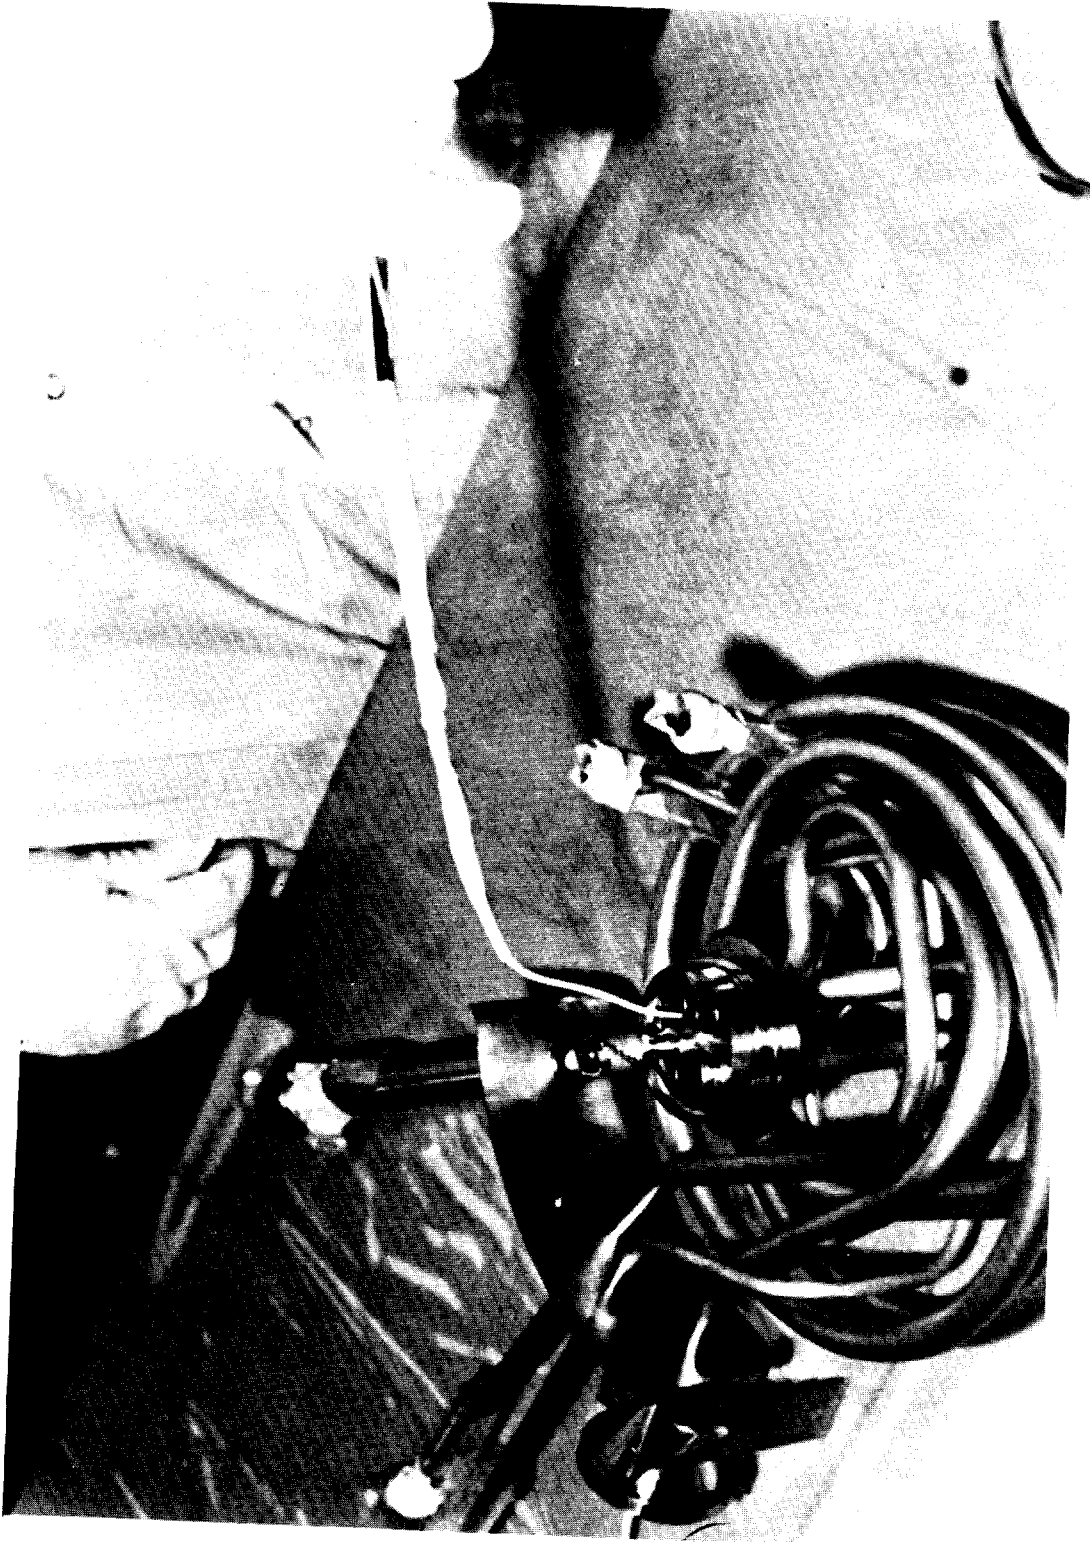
Pulling quantity probe wires into upper coil assembly.
